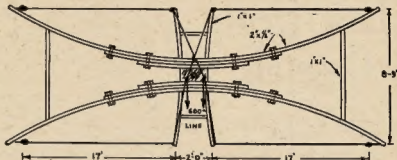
Constructional Details of the Cheap Beam. Plan of the bows and cradle.
